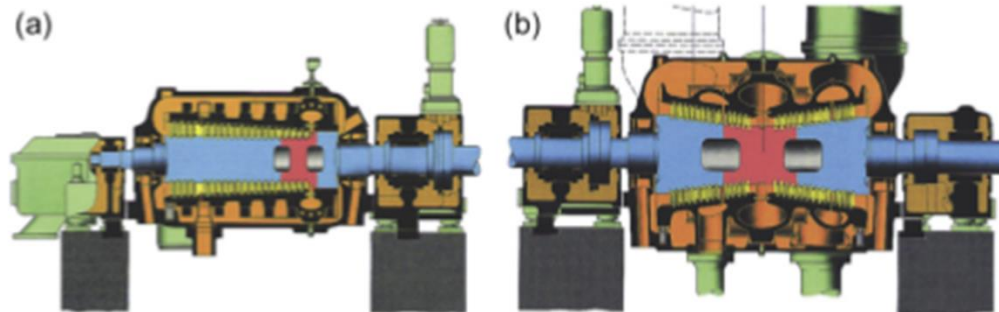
Alstom HP and IP turbines with welded rotors using 10% Cr steel in the hottest regions: (a) single flow, (b) double flux [34].
